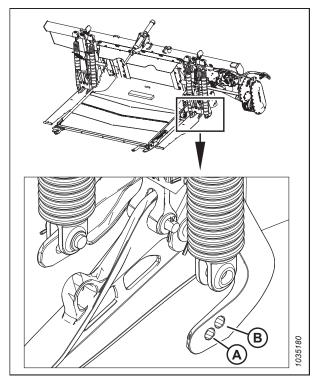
Left Float Spring – Installed in Rear Float Lever Hole
